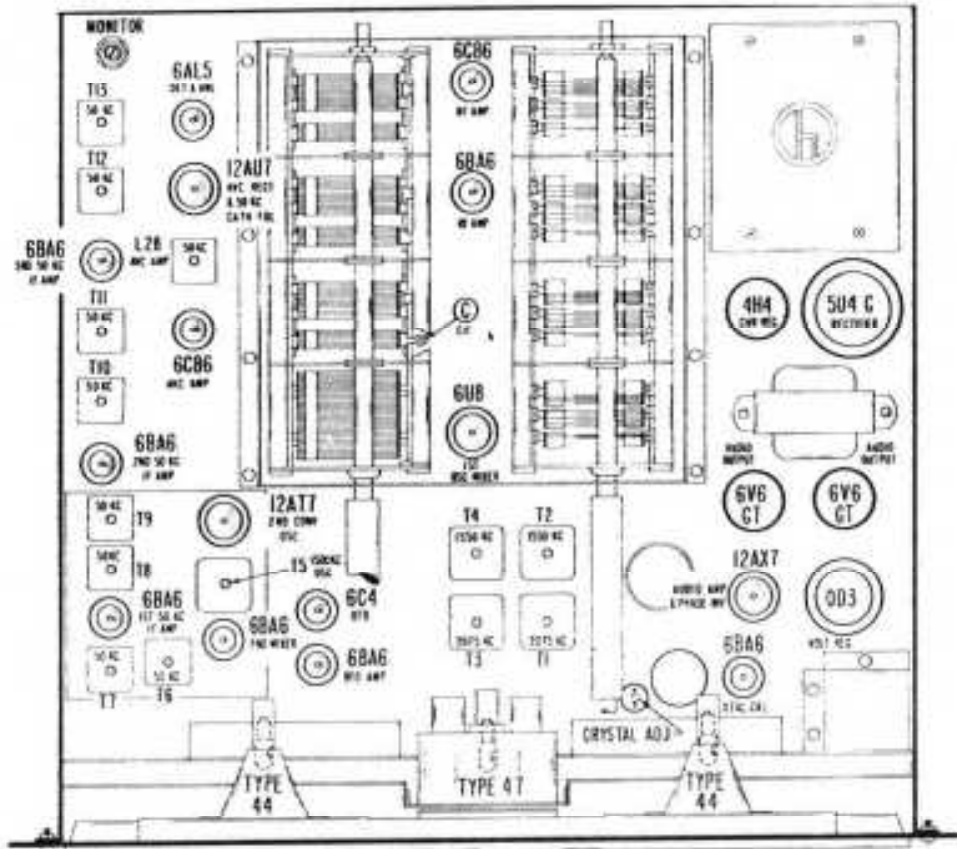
Top View of Chassis Showing Location of Alignment Adjustments, Tubes, and Dial Lamps
